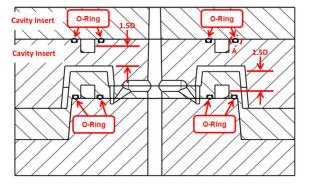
Design of a CC mold with milling-grooved channels (Reprinted by permission from [87], Copyright 2015 Wiley Periodicals, Inc.).
